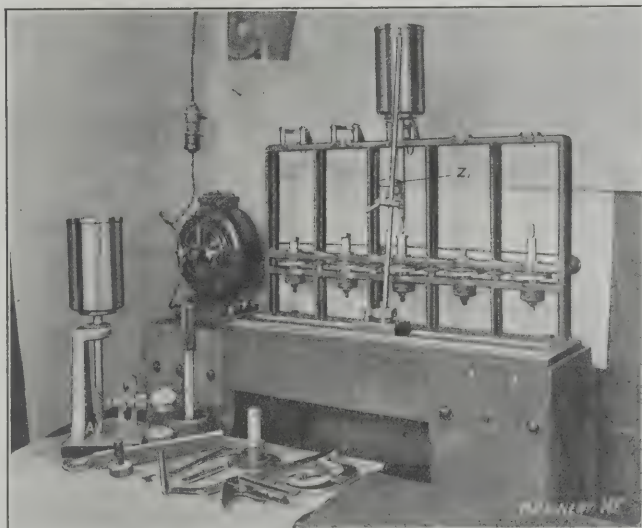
Testing Outfit for Inspecting the Bowls and Spindles
